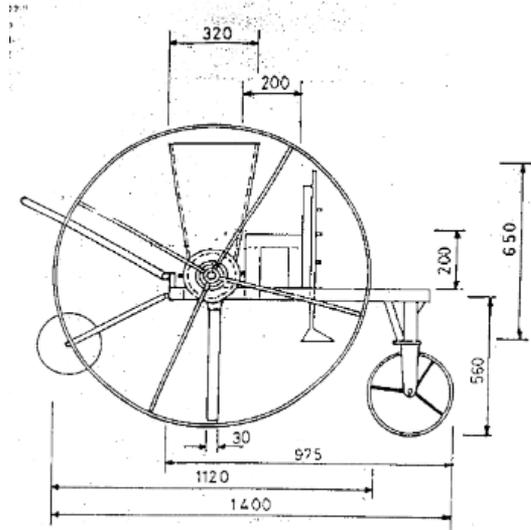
End view of the Multipurpose Row Crop Planting Machine
